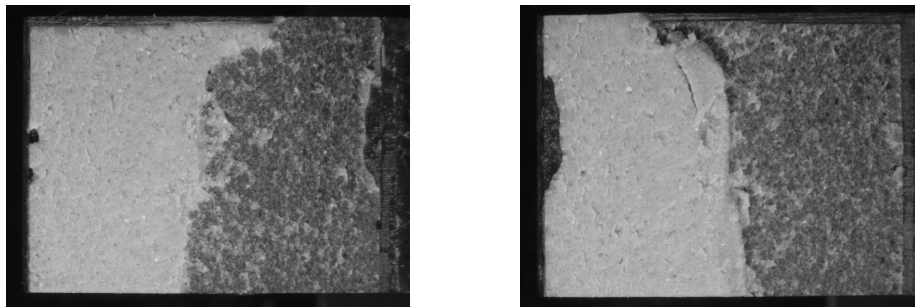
Fracture surfaces of a CFRP-CFRP SLJ.
